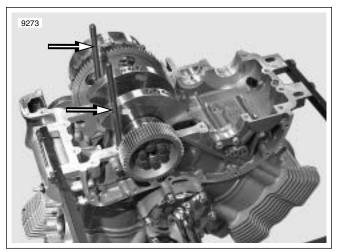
Lower Crankcase Alignment Dowels (HD-45310)
